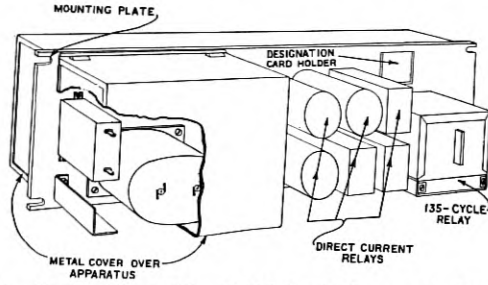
Typical Assembly of 135-Cycle Composite Ringer Set
